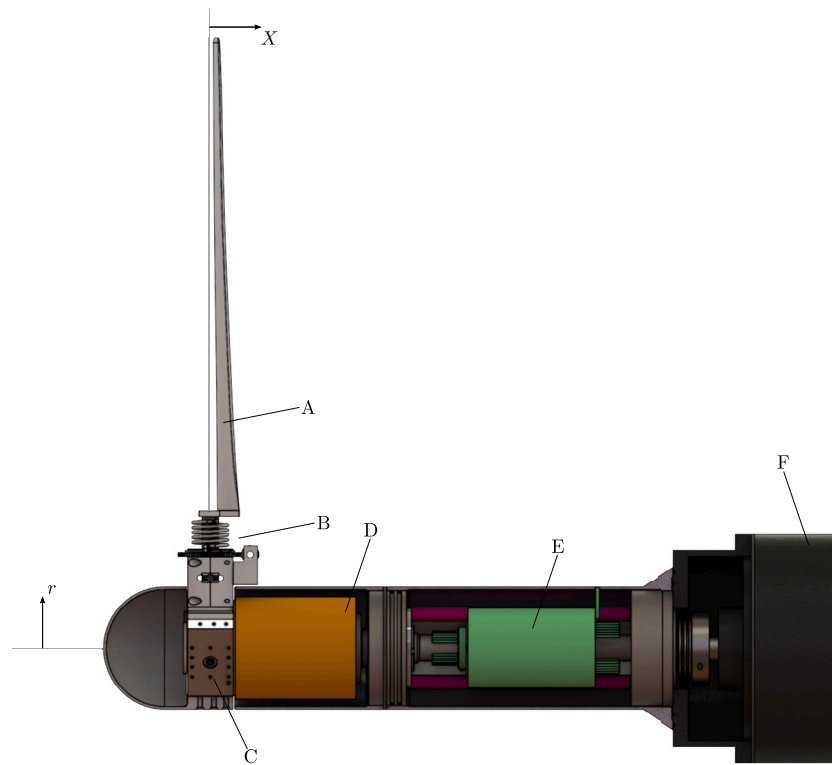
Sketch of the turbine used during this experimental campaign with annotated components: (A) turbine blade; (B) passive pitching system; (C) turbine hub; (D) load cell and transducer; (E) slip ring assembly; (F) brushless DC generator. Fairings are shown in sectioned view for clarity.
